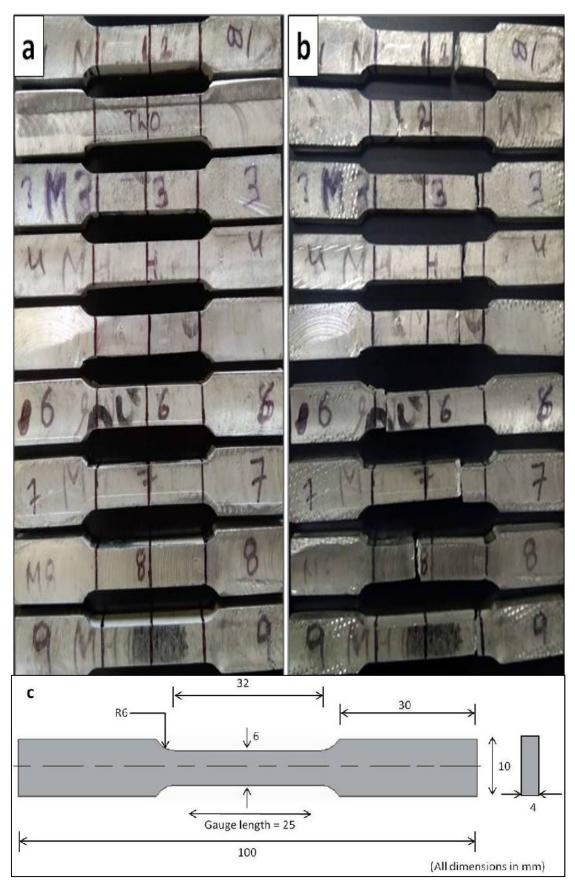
Tensile specimens (a) before fracture; (b) after fracture and (c) prepared as per ASTM B557M-06
